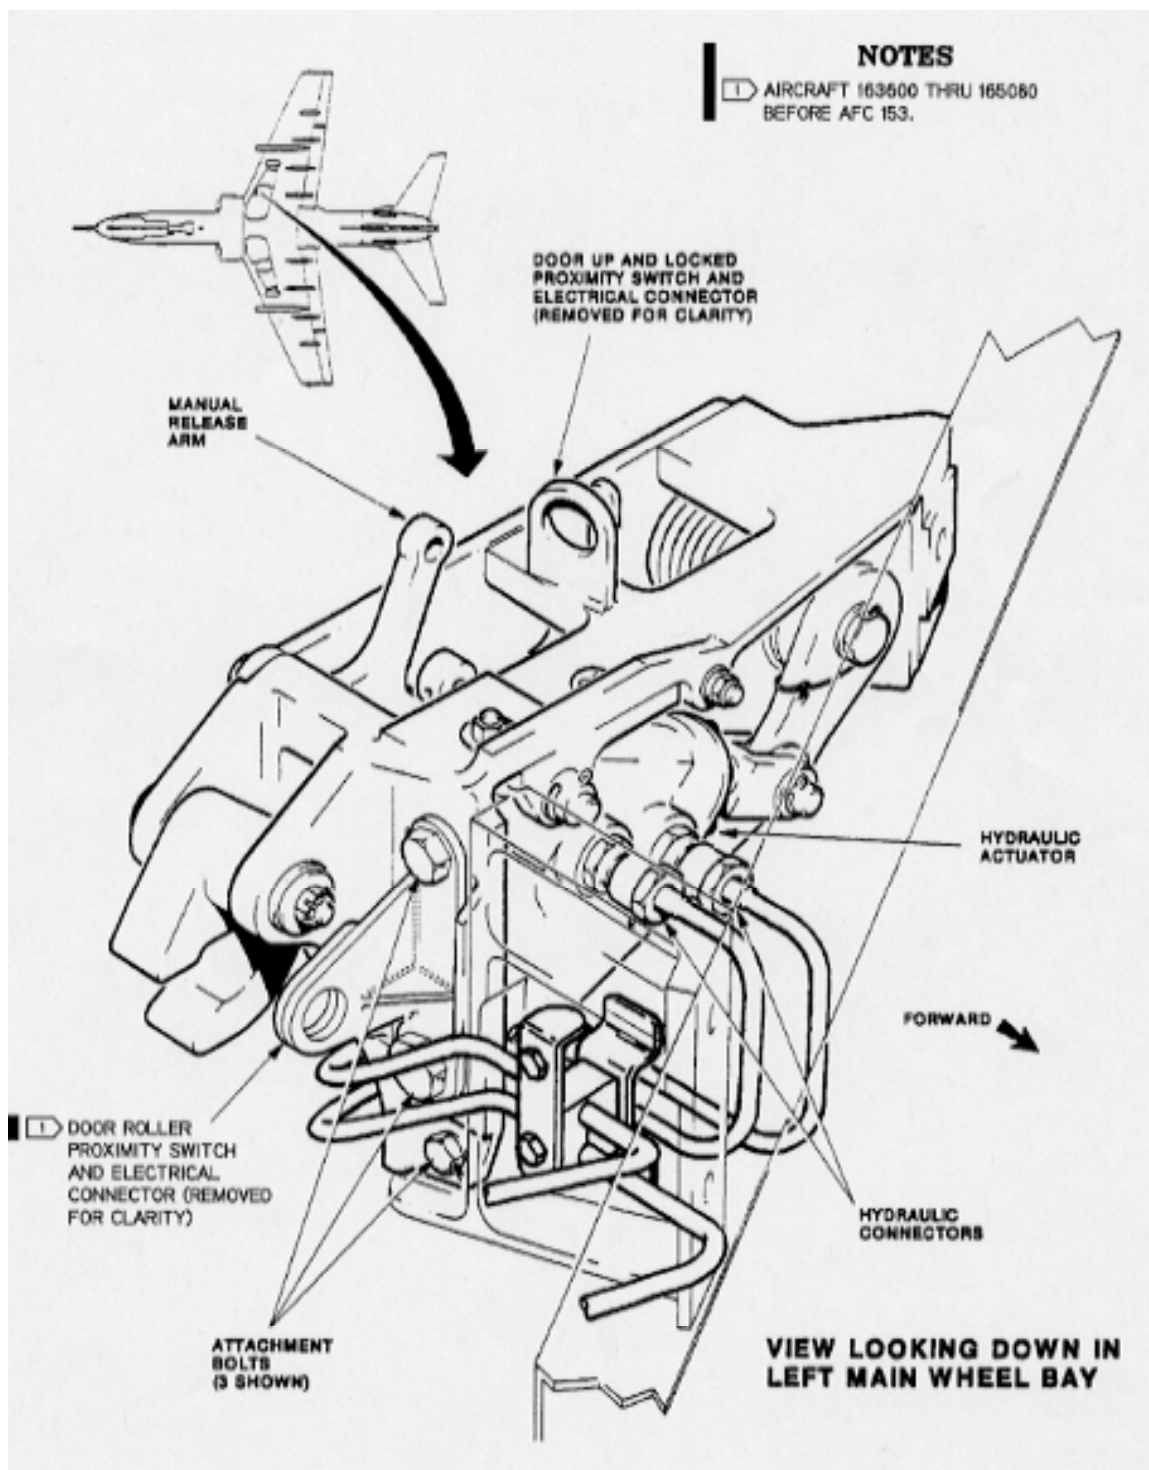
MAIN LANDING GEAR WHEEL DOOR UPLOCK ACTUATOR AND UPLOCK (Technical Manual, Reference 3)
